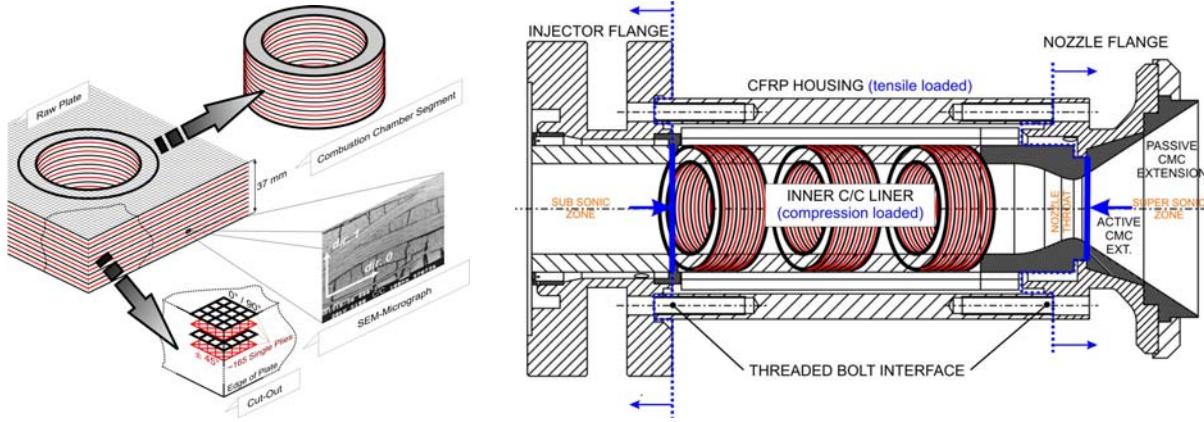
CMC thrust chamber assembly. All single parts of the thrust chamber body are assembled without bonding.
